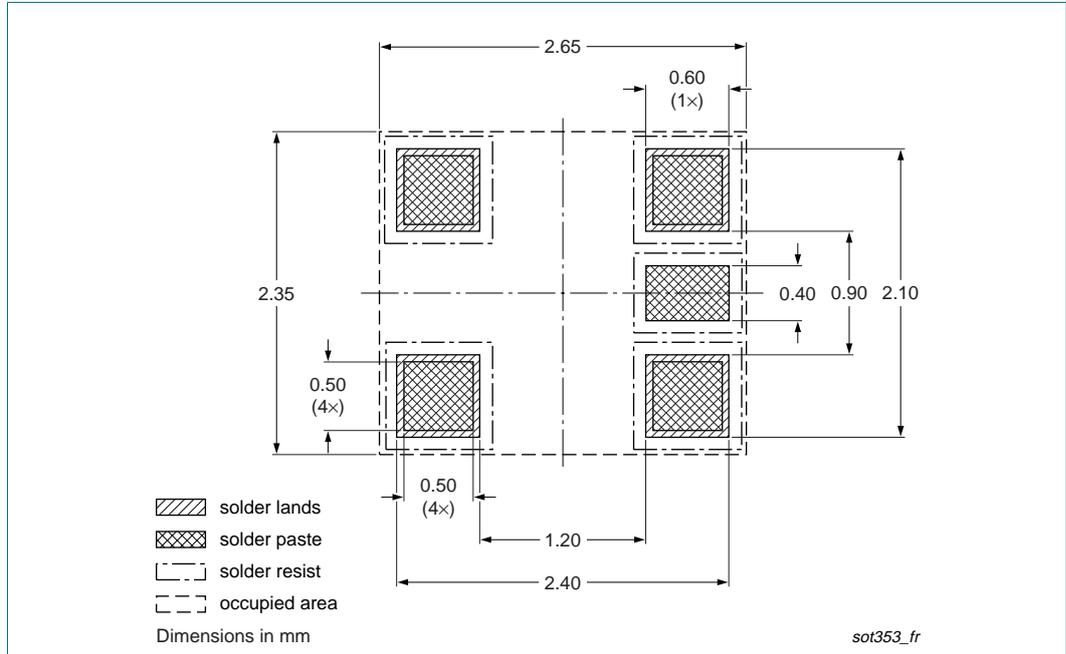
Reflow soldering footprint SOT353 (SC-88A)
